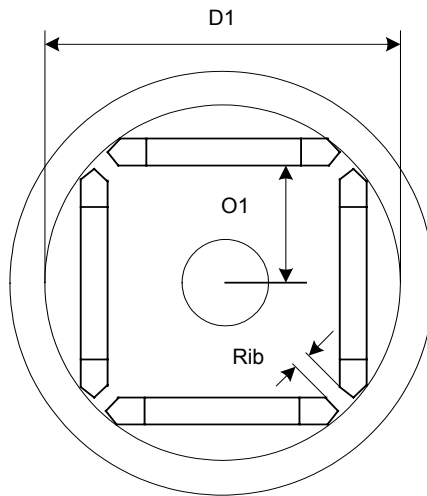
Magnet duct dimensions of the buried magnet test motor.
